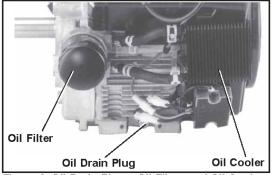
Oil Drain Plugs, Oil Filter, and Oil Cooler (Blower Housing Mounted).
